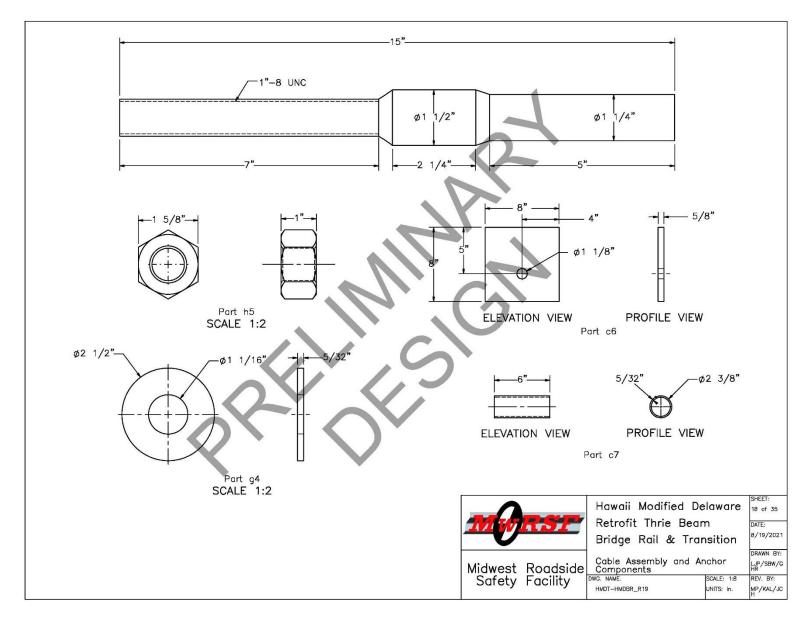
Cable Assembly and Anchor Components, Test No. HMDT-1
